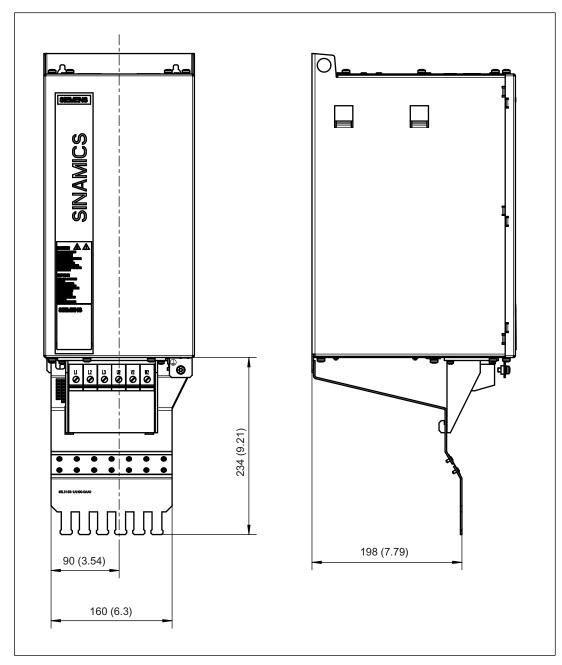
Dimension drawing of shield connecting plate on the 55 kW Active Interface Module, all dimensions in mm and (inches)
